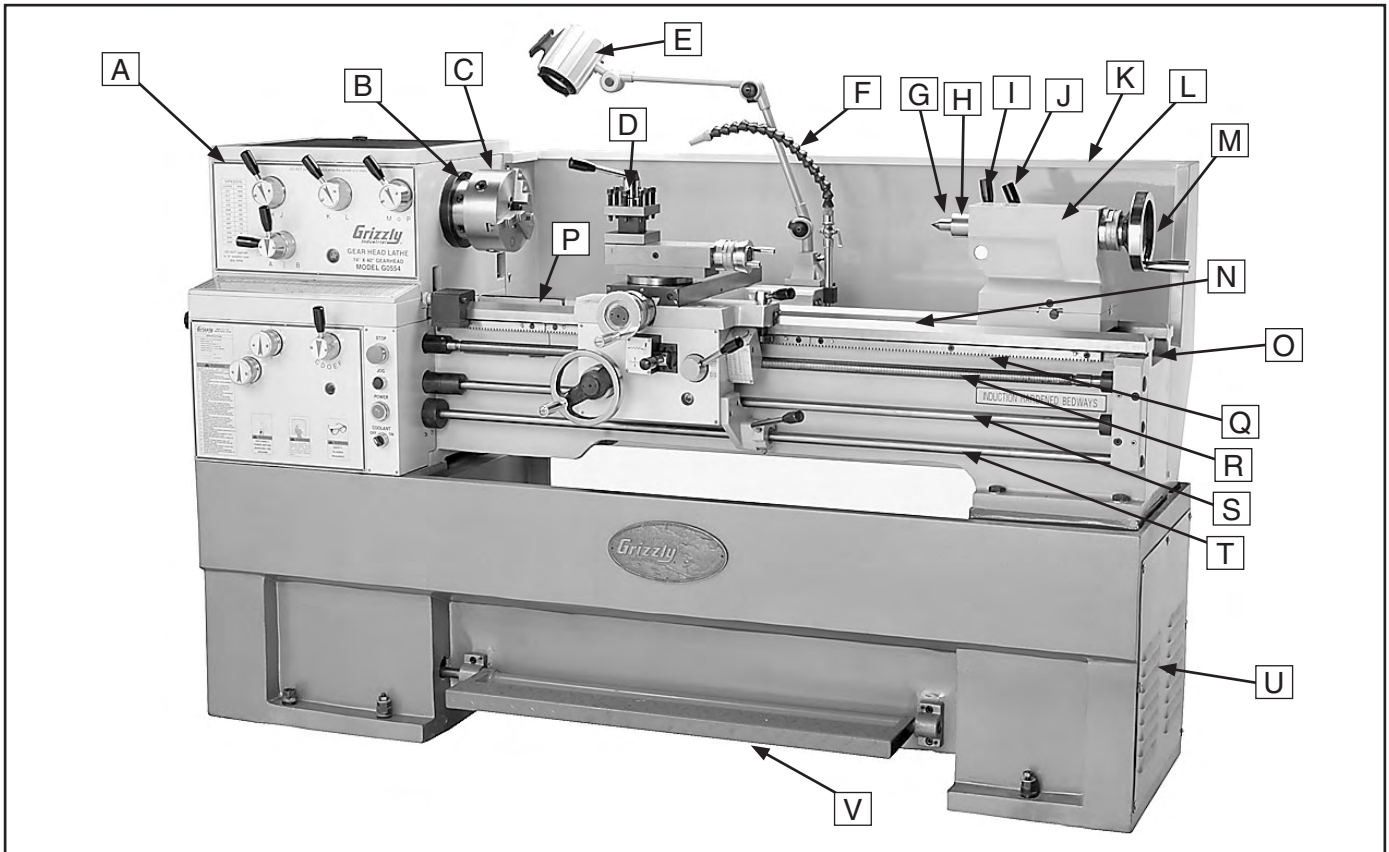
The Model G0554 Gear-Head Floor Lathe.
